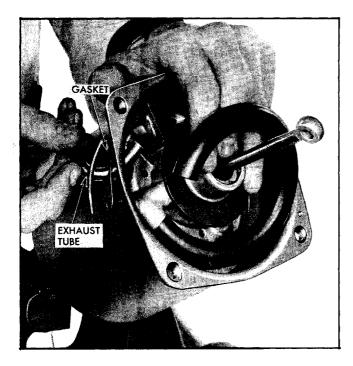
Removing or Replacing Vacuum Intake Tube
